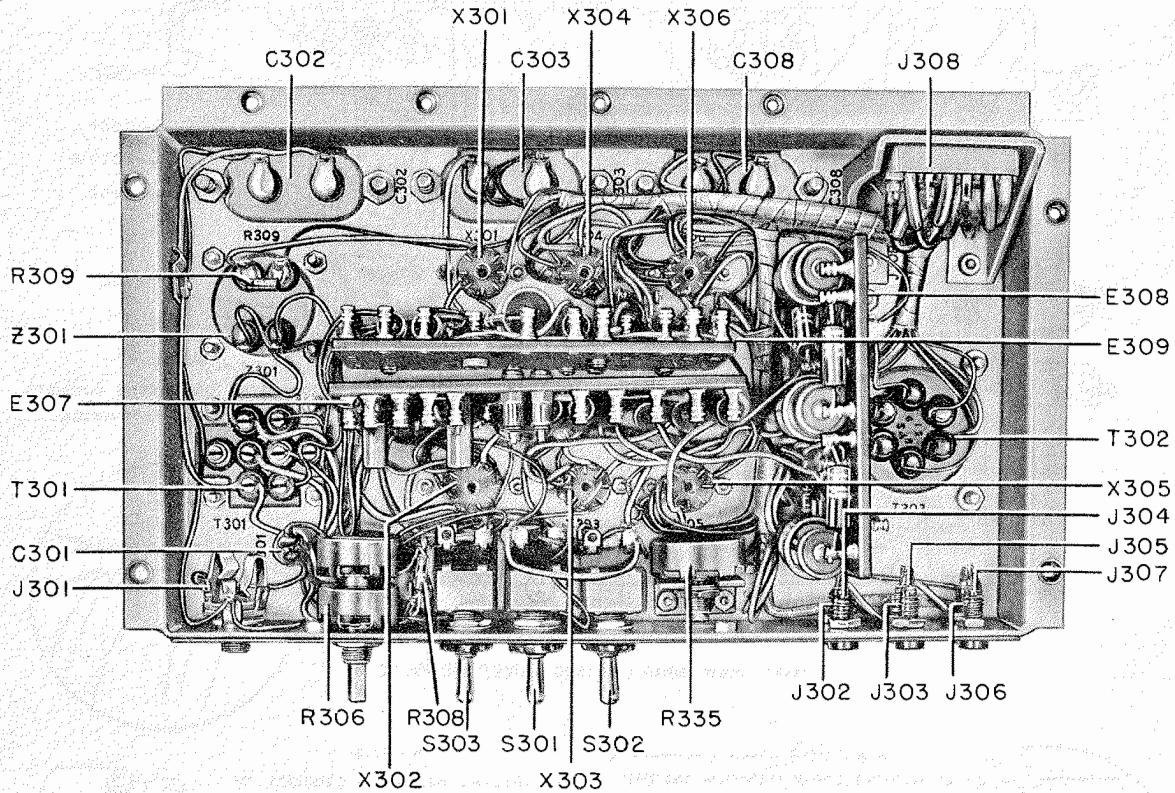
Modulator-Power Supply, Audio Driver Subassembly, Location of Electrical Parts
